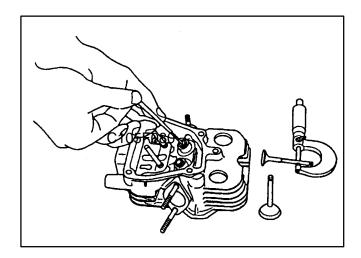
CLEARANCE BETWEEN VALVE STEM AND VALVE GUIDE
